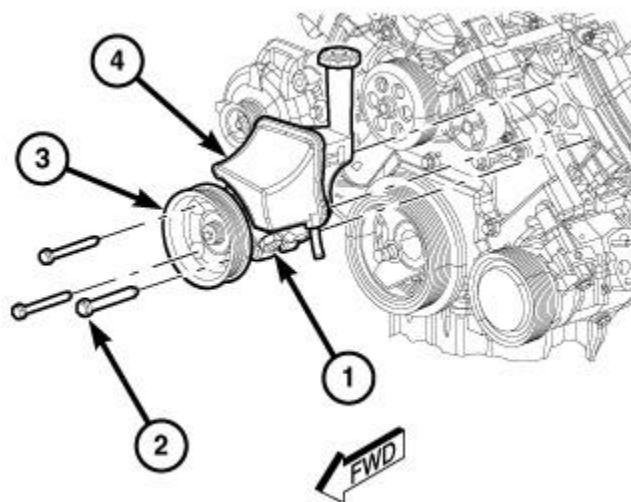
Power Steering Reservoir, Pump, Pulley & Bolts
